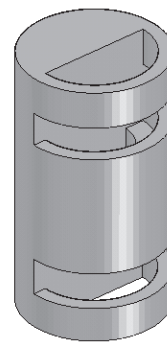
Resulting revolved cutout created by removing the material on the left of the profile
